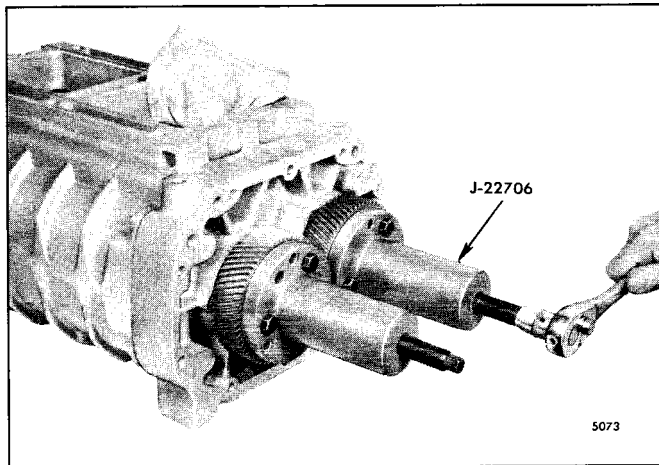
Removing Blower Gears using Tool J 22706-16
